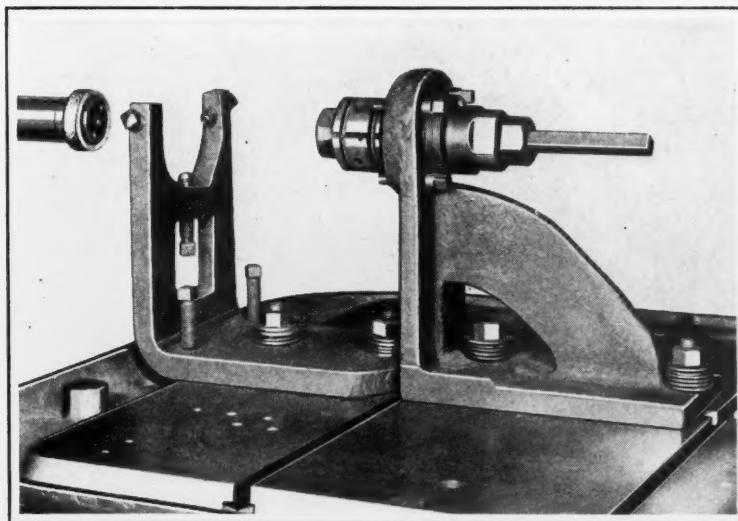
Fixture Used for Grinding Fire-door Cylinders, with Rapid-action Centering Device
